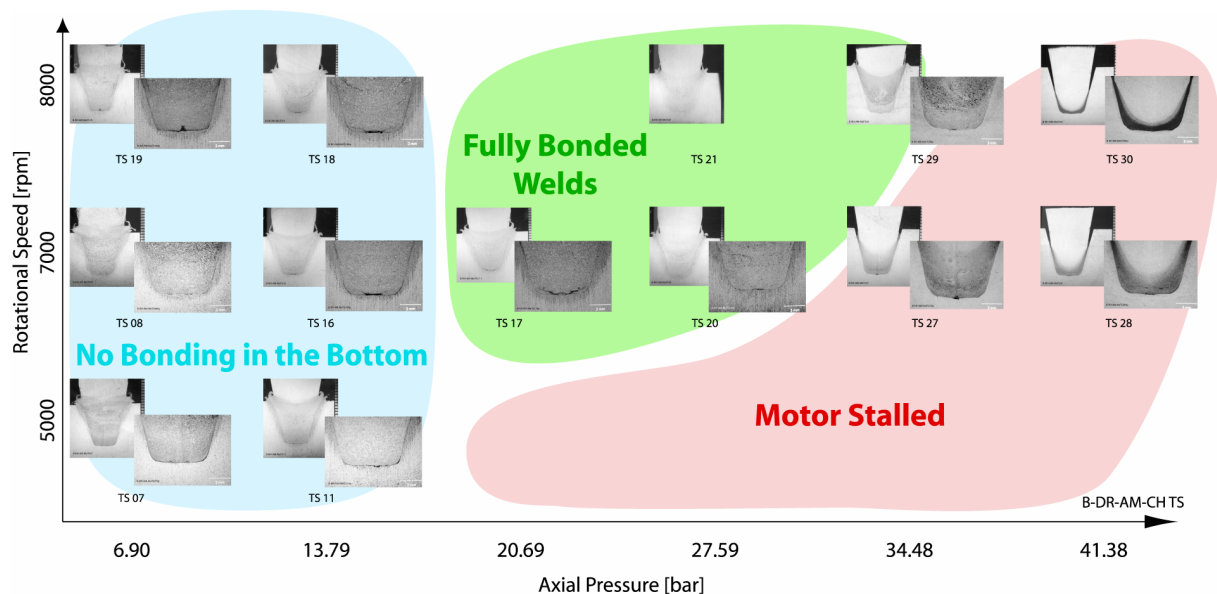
Welding parameter matrix for S235 tapered stud welds with macrographs of the complete weld and details of the bottom area.
